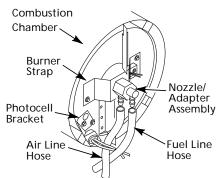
Removing Air and Fuel Line Hoses, (40, and 60,000 Btu/Hr Models Only)
